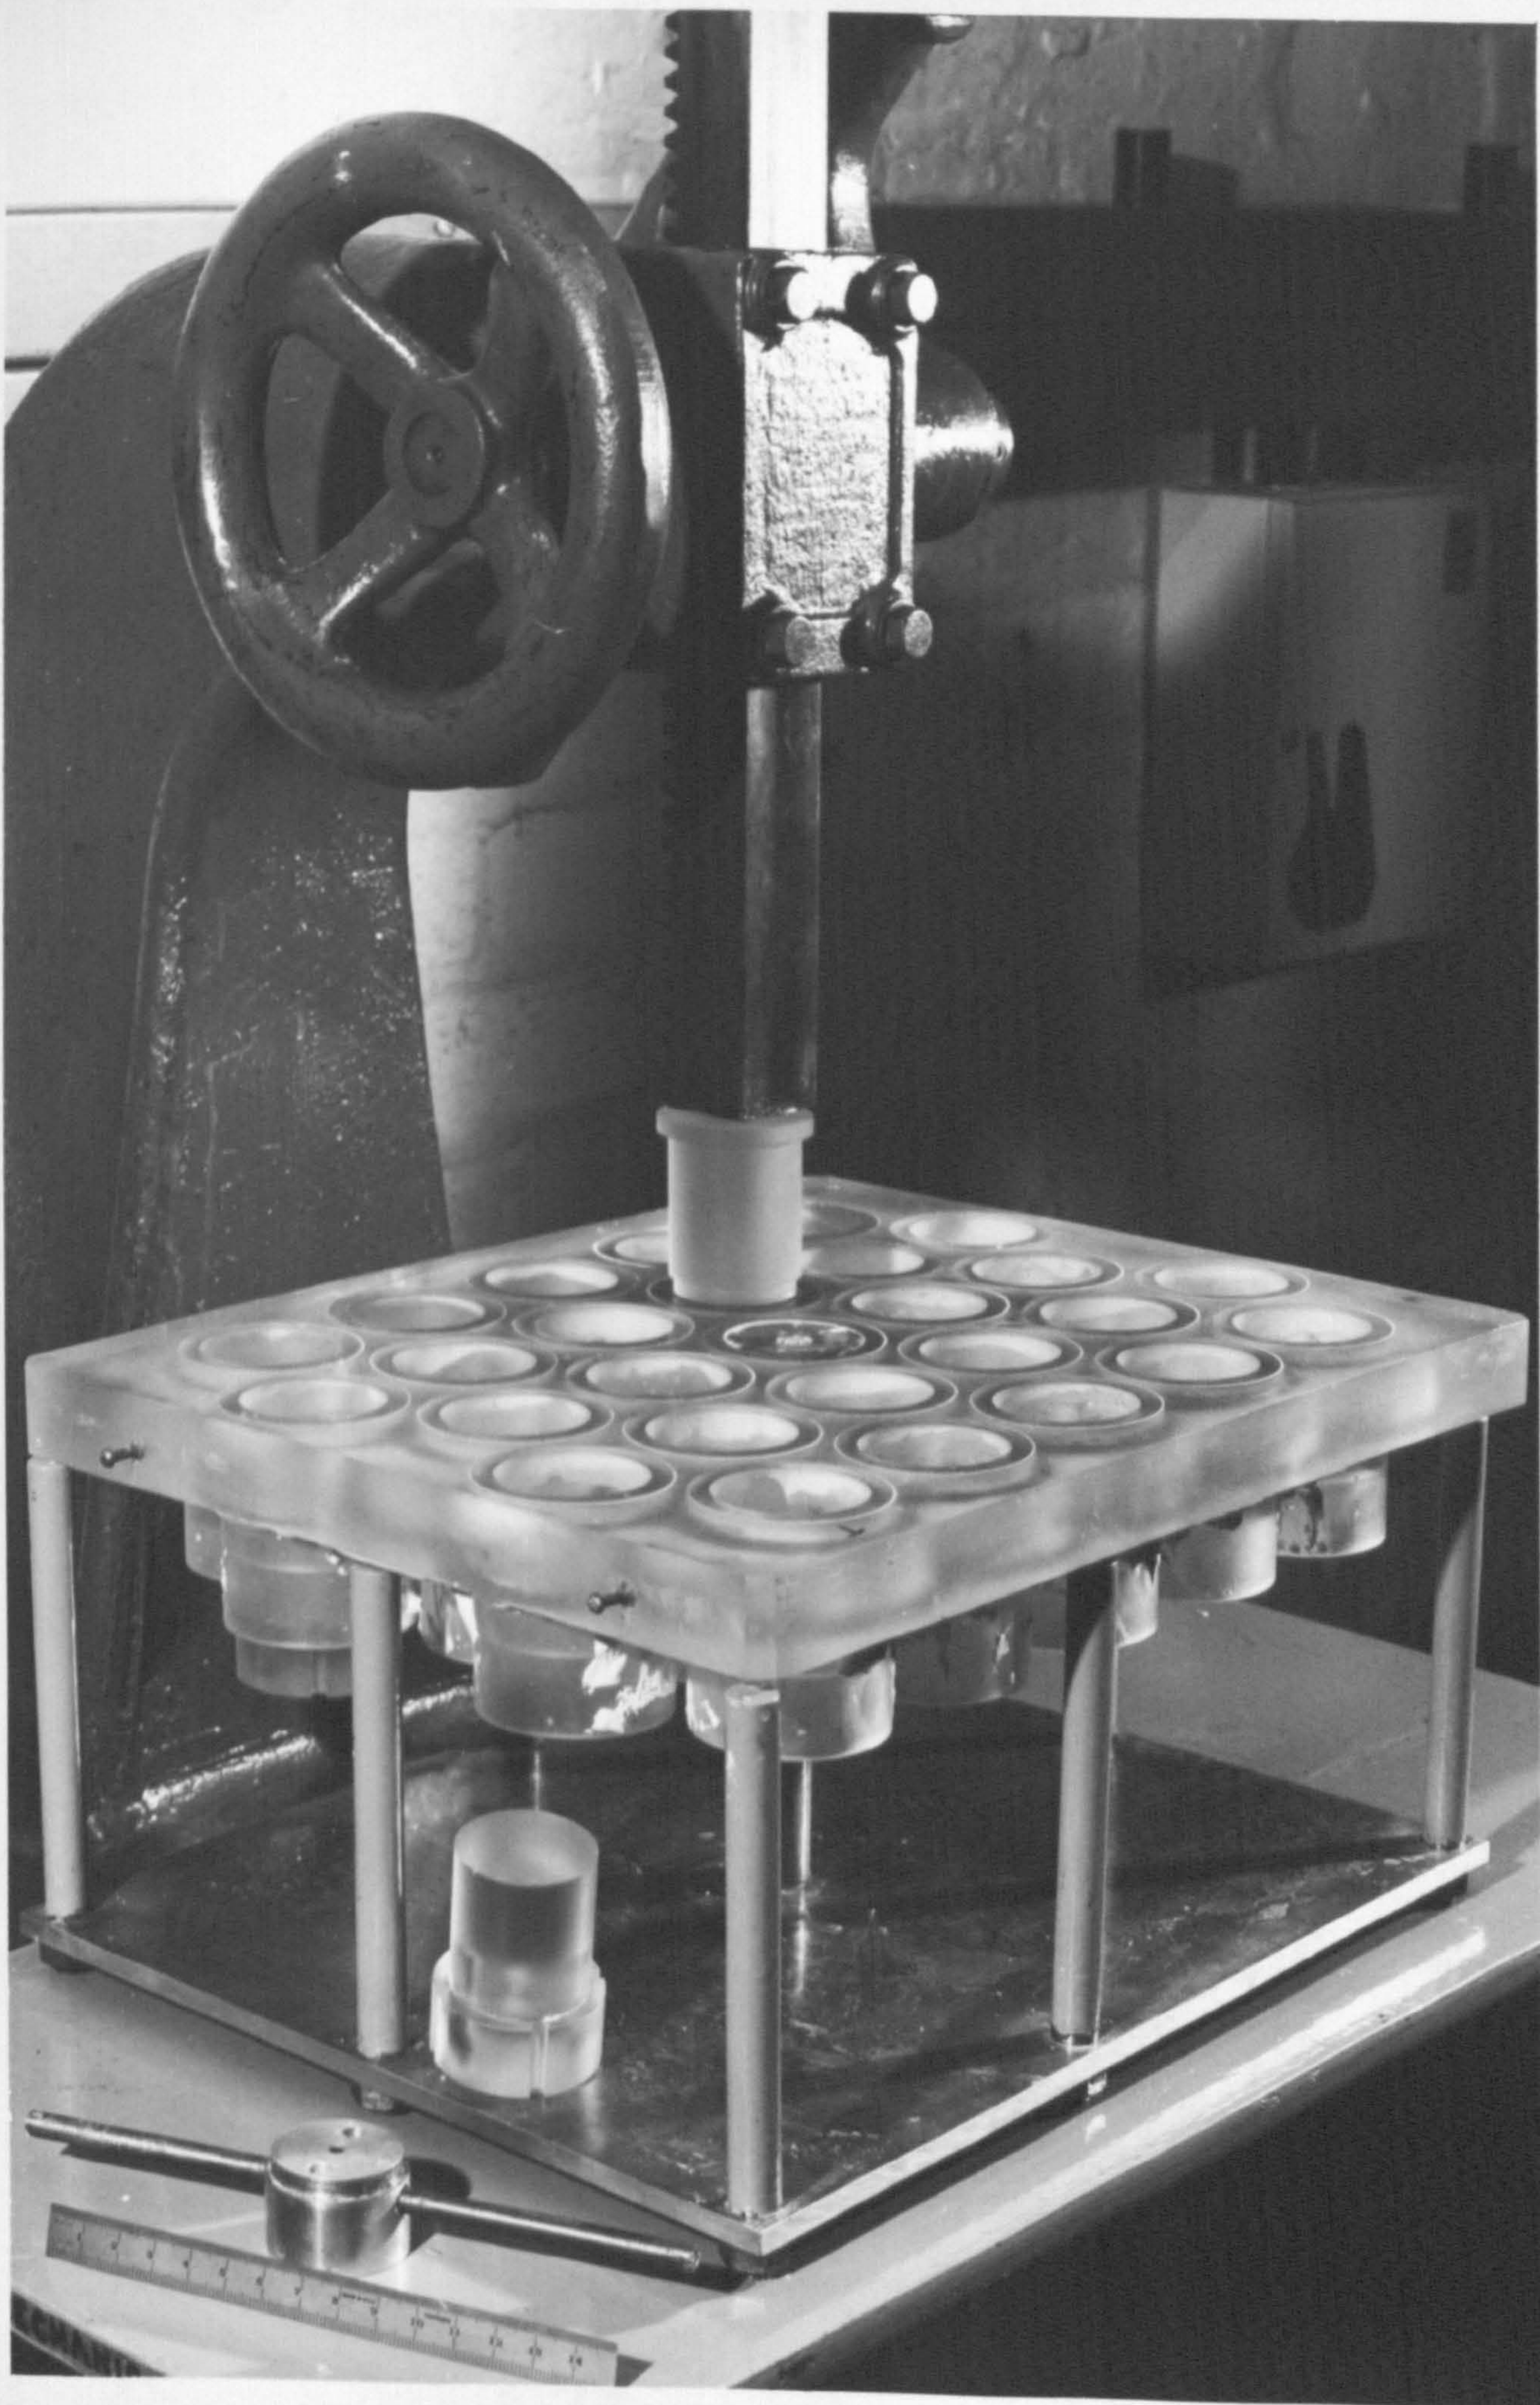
CYLINDER EXTRACTION DEVICE
